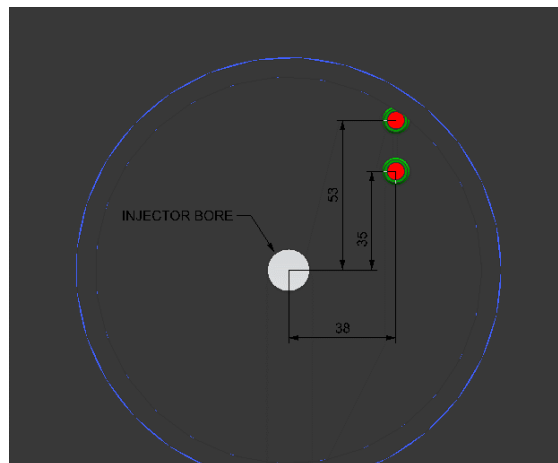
Cylinder Pressure and Heat Flux Transducer Dimensions
